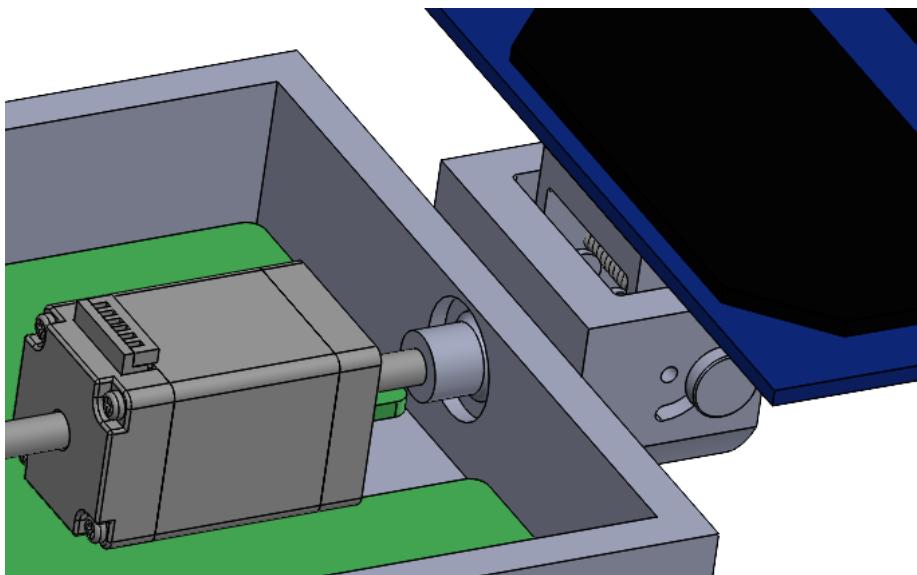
After hinge locking, the stepper motor (model) can directly drive the turn table which then spins the hinge along with the solar array. See Appendix for PCB details
